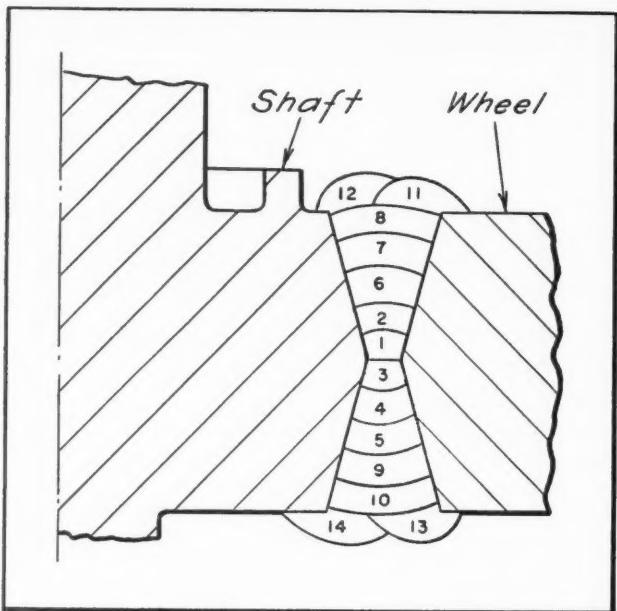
Cross-sectional diagram of a turbine wheel and shaft joint, showing the multi-bead welding technique used and the sequence in which the beads are applied
